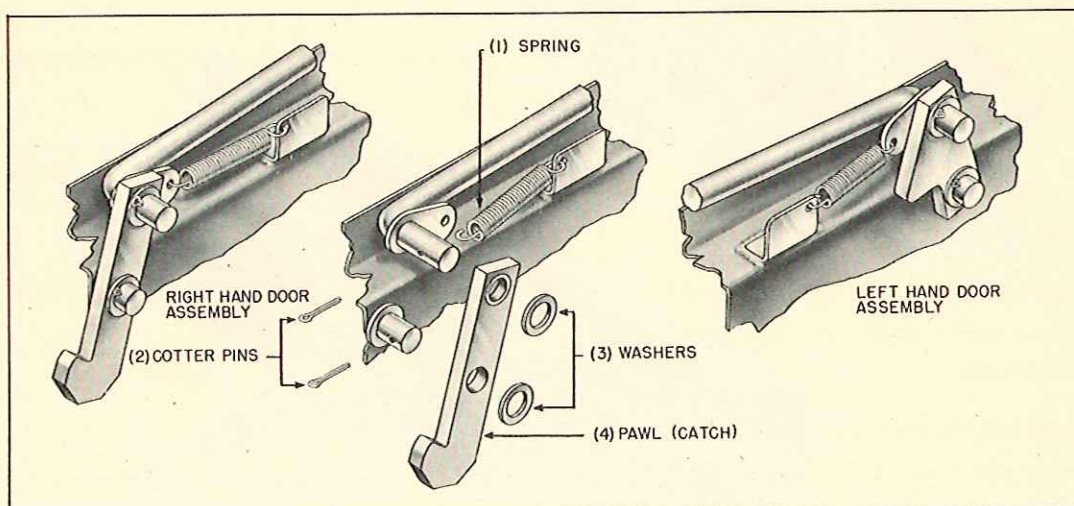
Pawl (catch) (right- and left-hand), assemblies, right-hand exploded, TLD-2(crs) door.
